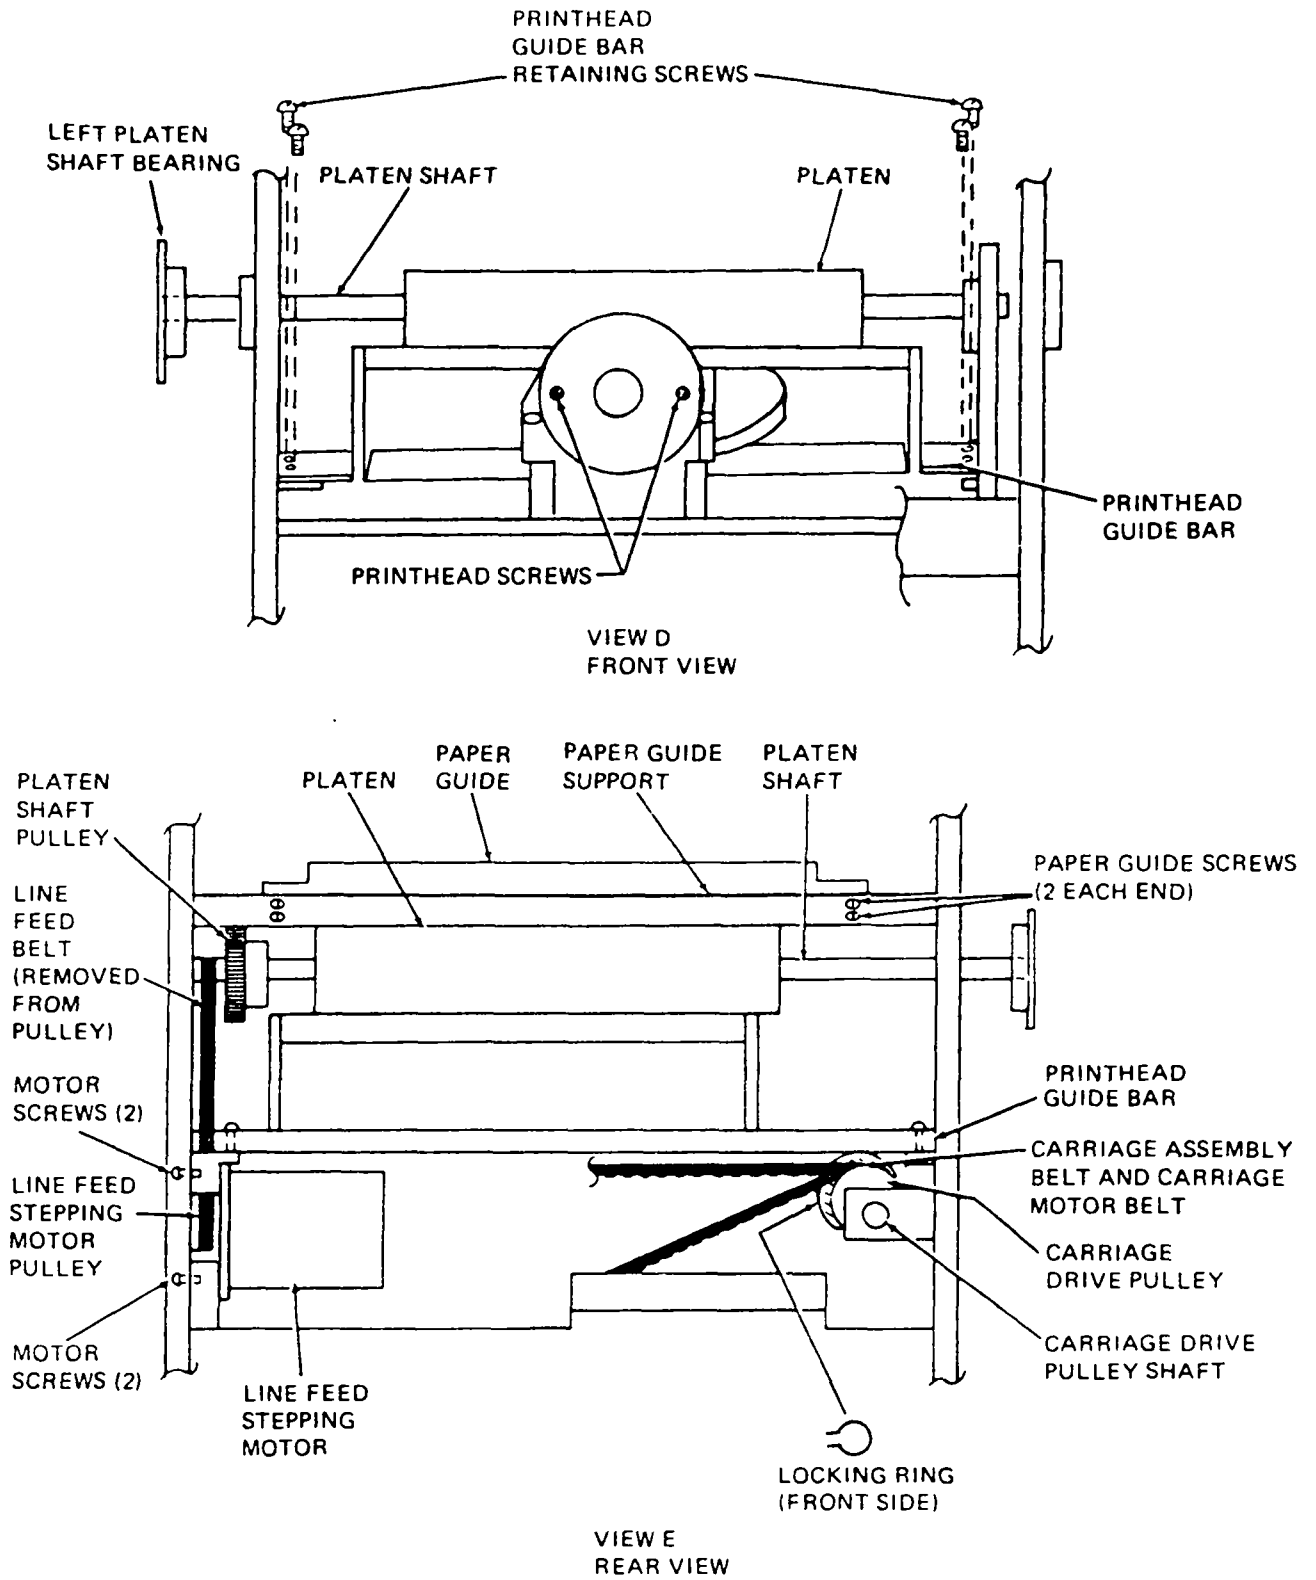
Print Mechanism Module, Carriage and Line Feed Belts (Sheet 2 of 2)
